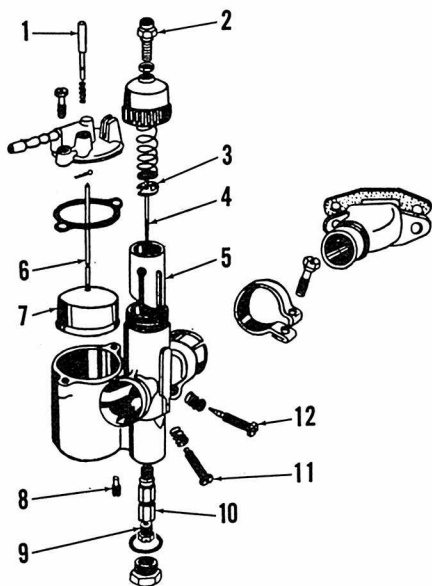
Exploded view of Fisher-Amal carburetor.
